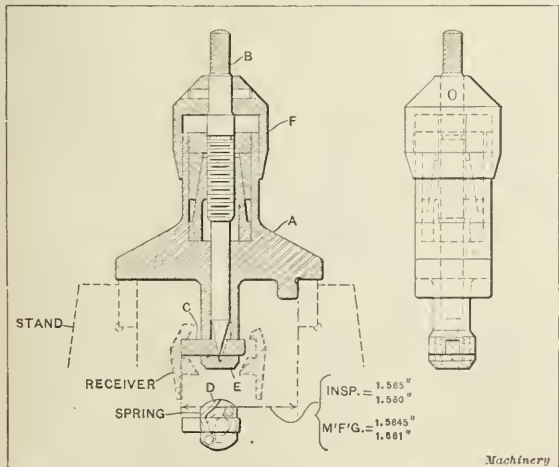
Micrometer Gage for testing Location of Bolt Guide Groove in Military Rifle Receiver
